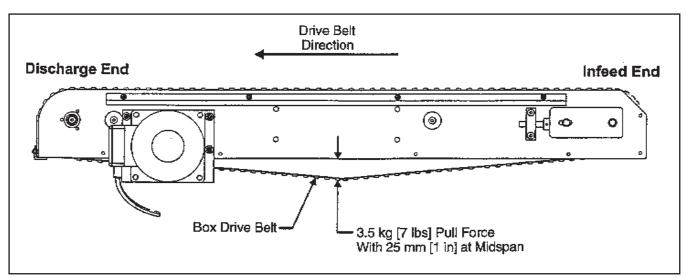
Box Drive Belt Tension Adjustment, Top View
